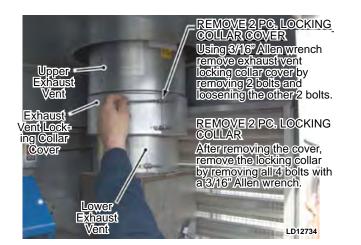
REMOVE EXHAUST VENT LOCKING COLLAR COVER AND LOCKING COLLAR
